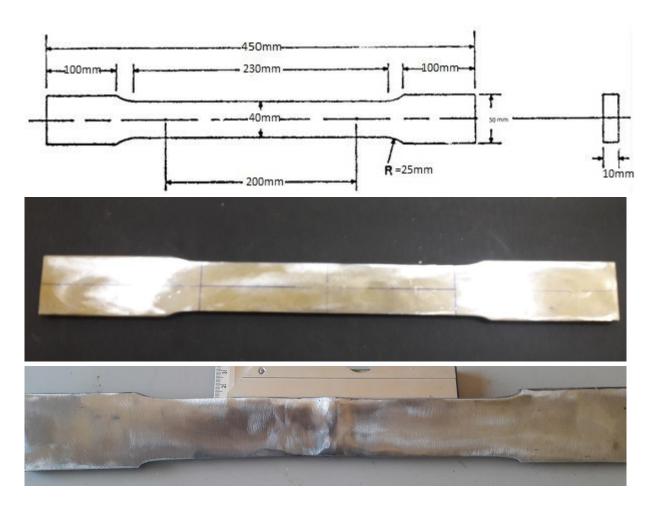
Standard ASTM (E8/E8M-9).Dimensions of the specimen.
